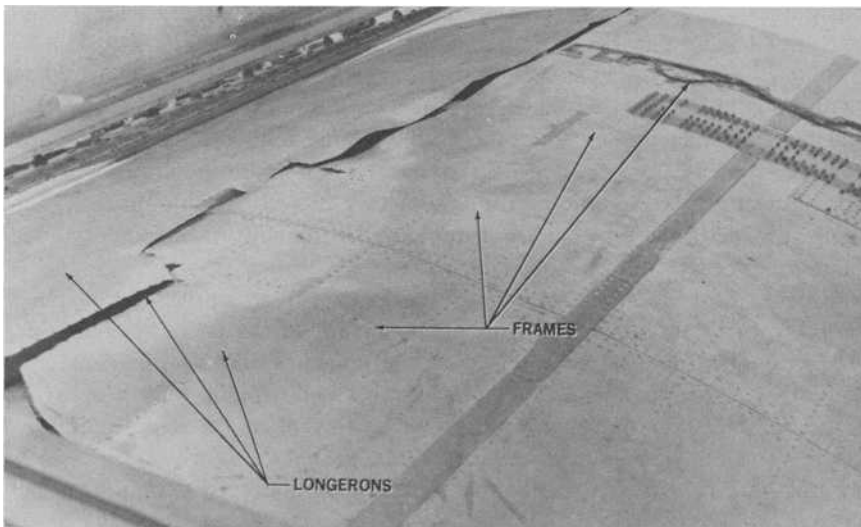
Riveted, curved panel crack propagation after fast fracture.
